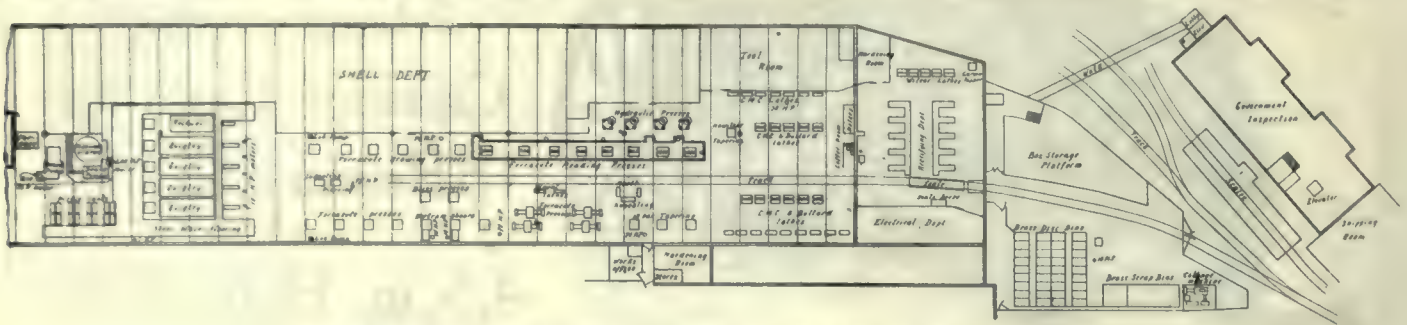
GROUND PLAN SHOWING THE PLANT LAYOUT FEATURES.
